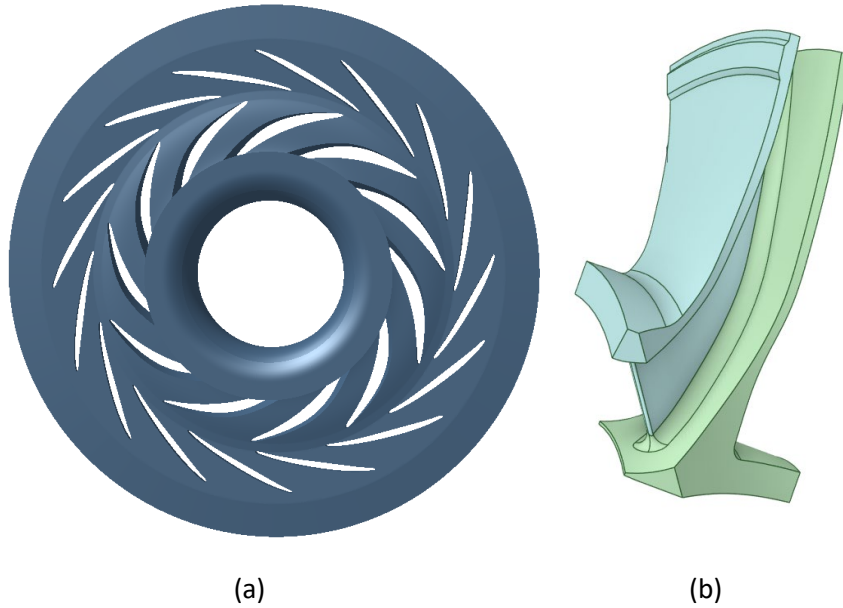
(a) Impeller/Vaned Diffuser Sectional View (b) Impeller Sector Model
